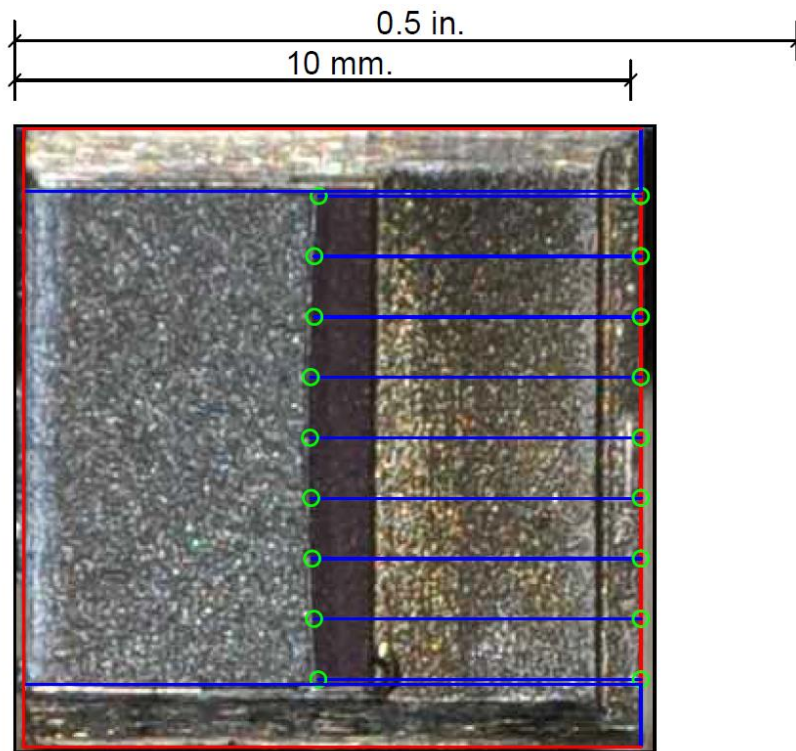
Specimen E20' Fracture Surface
